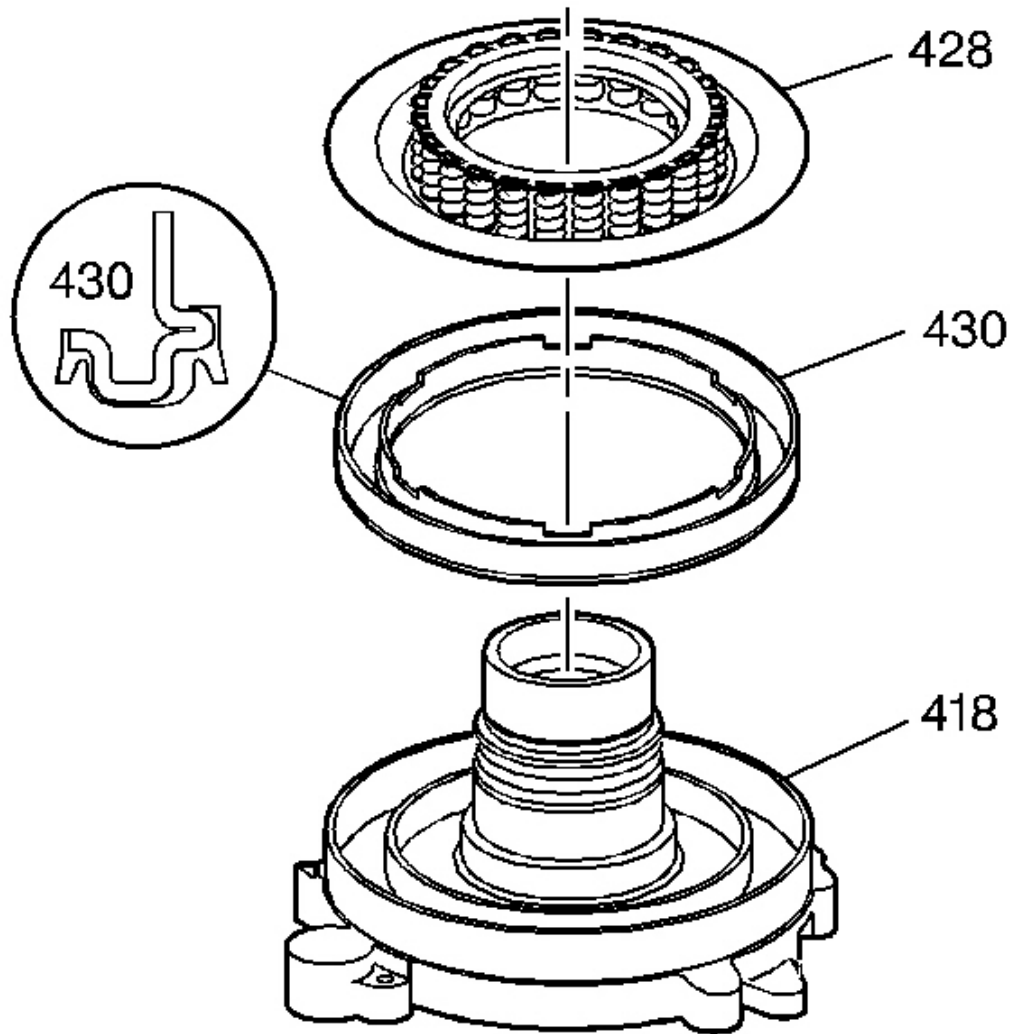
View Of Second Clutch Piston And Seal Assembly
